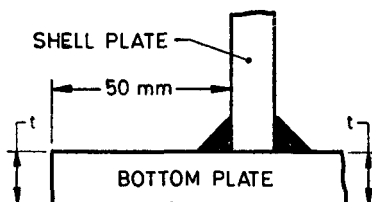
WELDED CONNECTION SHELL TO FLAT BOTTOM
